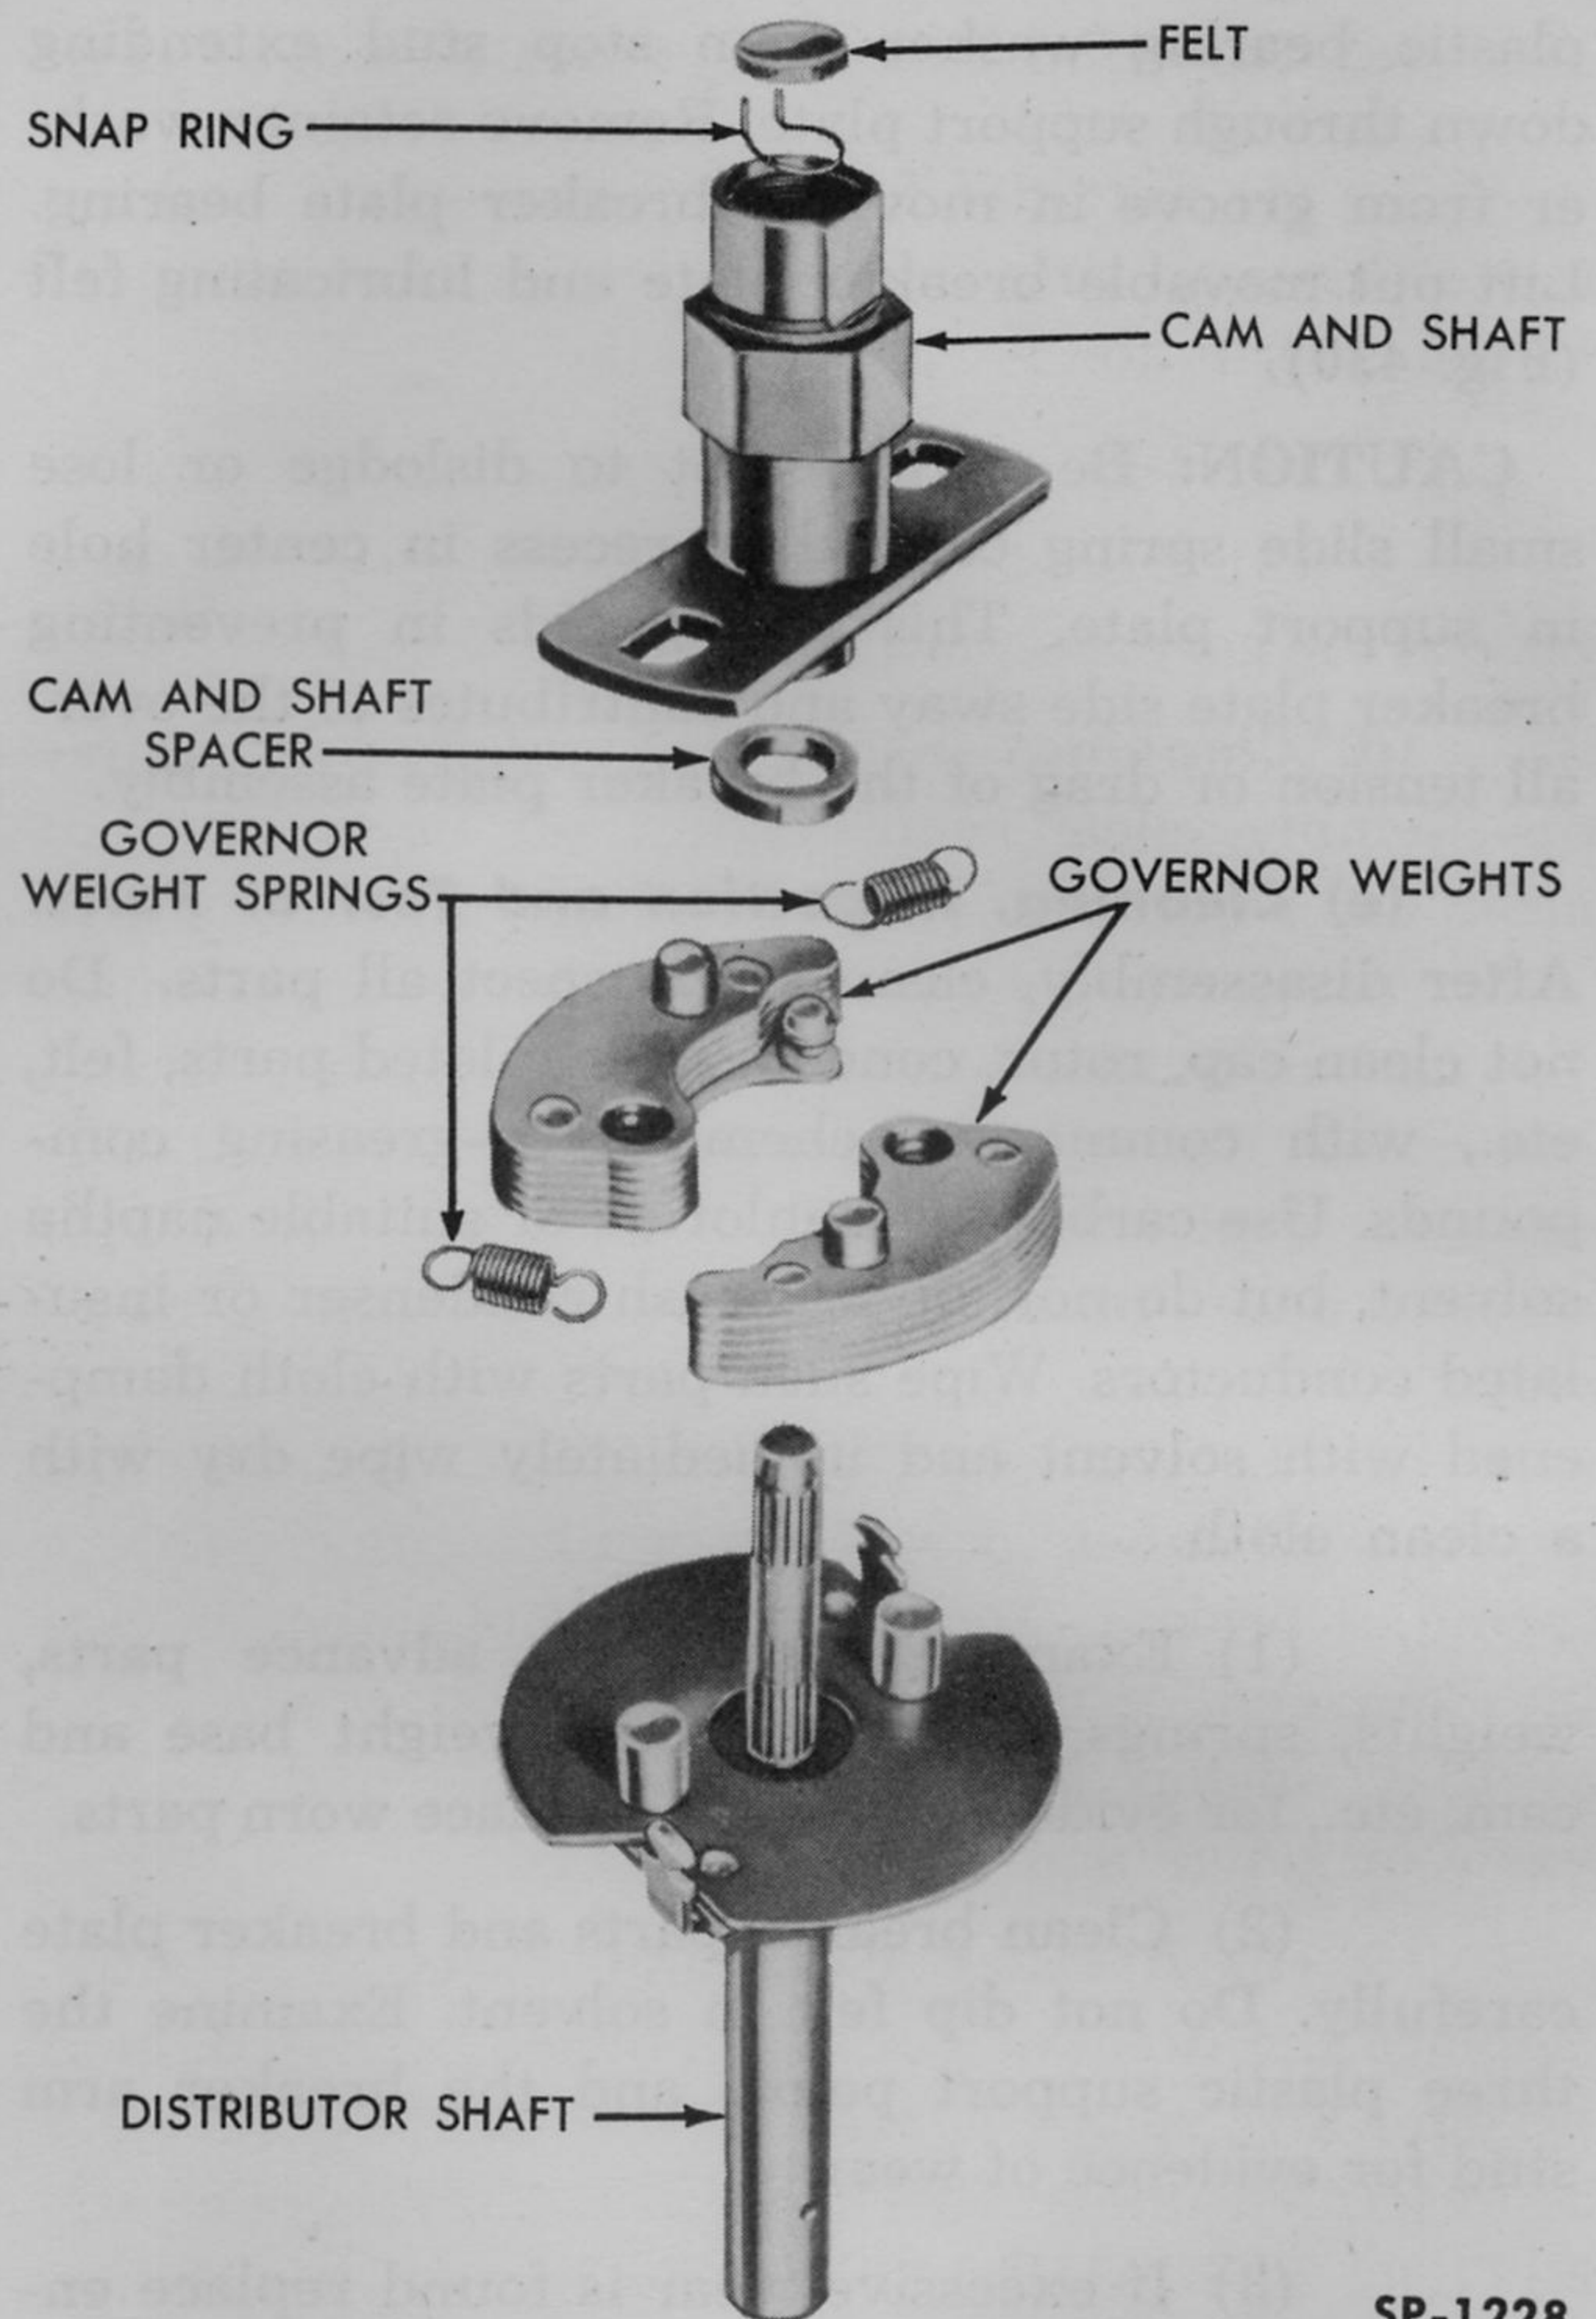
Frazer Distributor Breaker Parts—Exploded View
